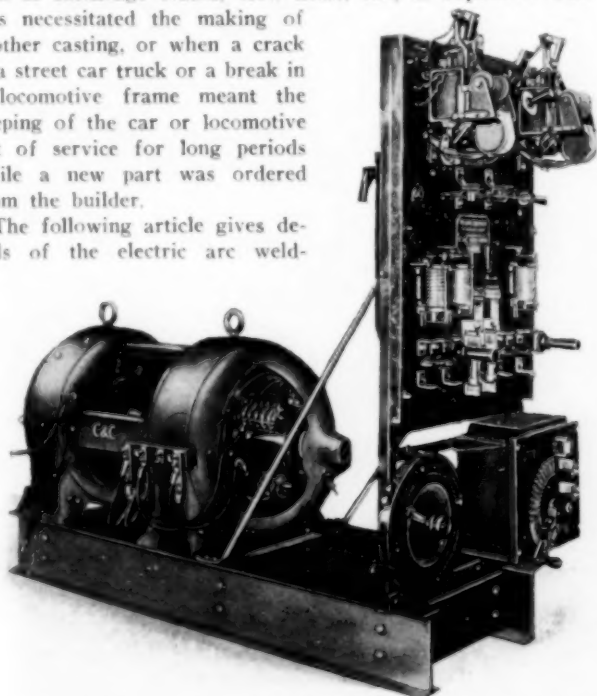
PORTABLE 300 AMPERE MULTIPLE UNIT WELDING OUTFIT
